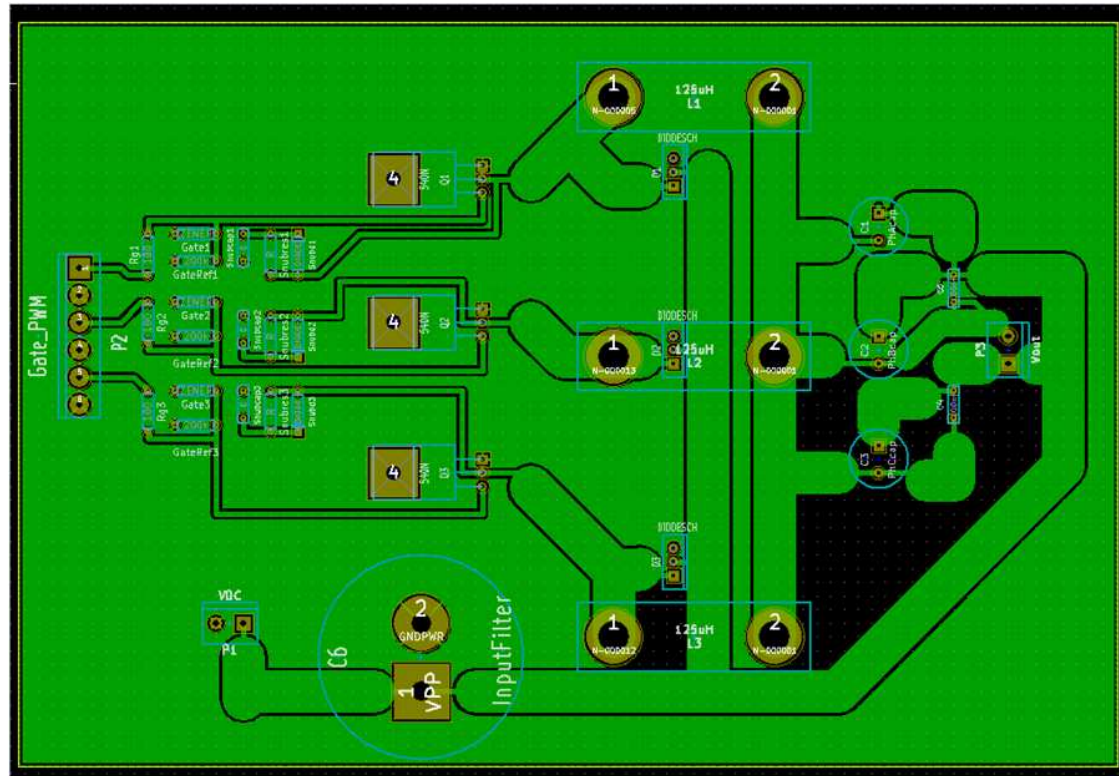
Circuit layout of the prototype multiphase interleaved buck converter board.
